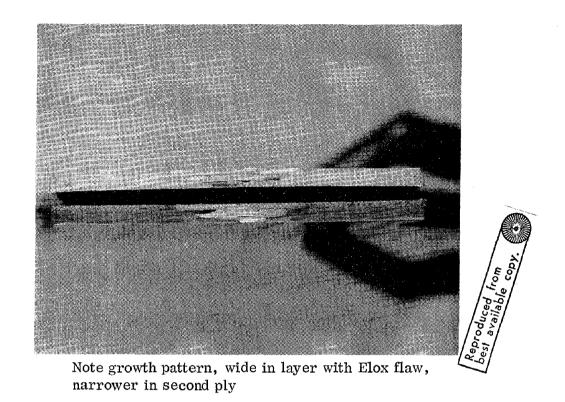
Fracture Surface of Specimen No. 353492-8A - Elox Notch at Center of Upper Edge
